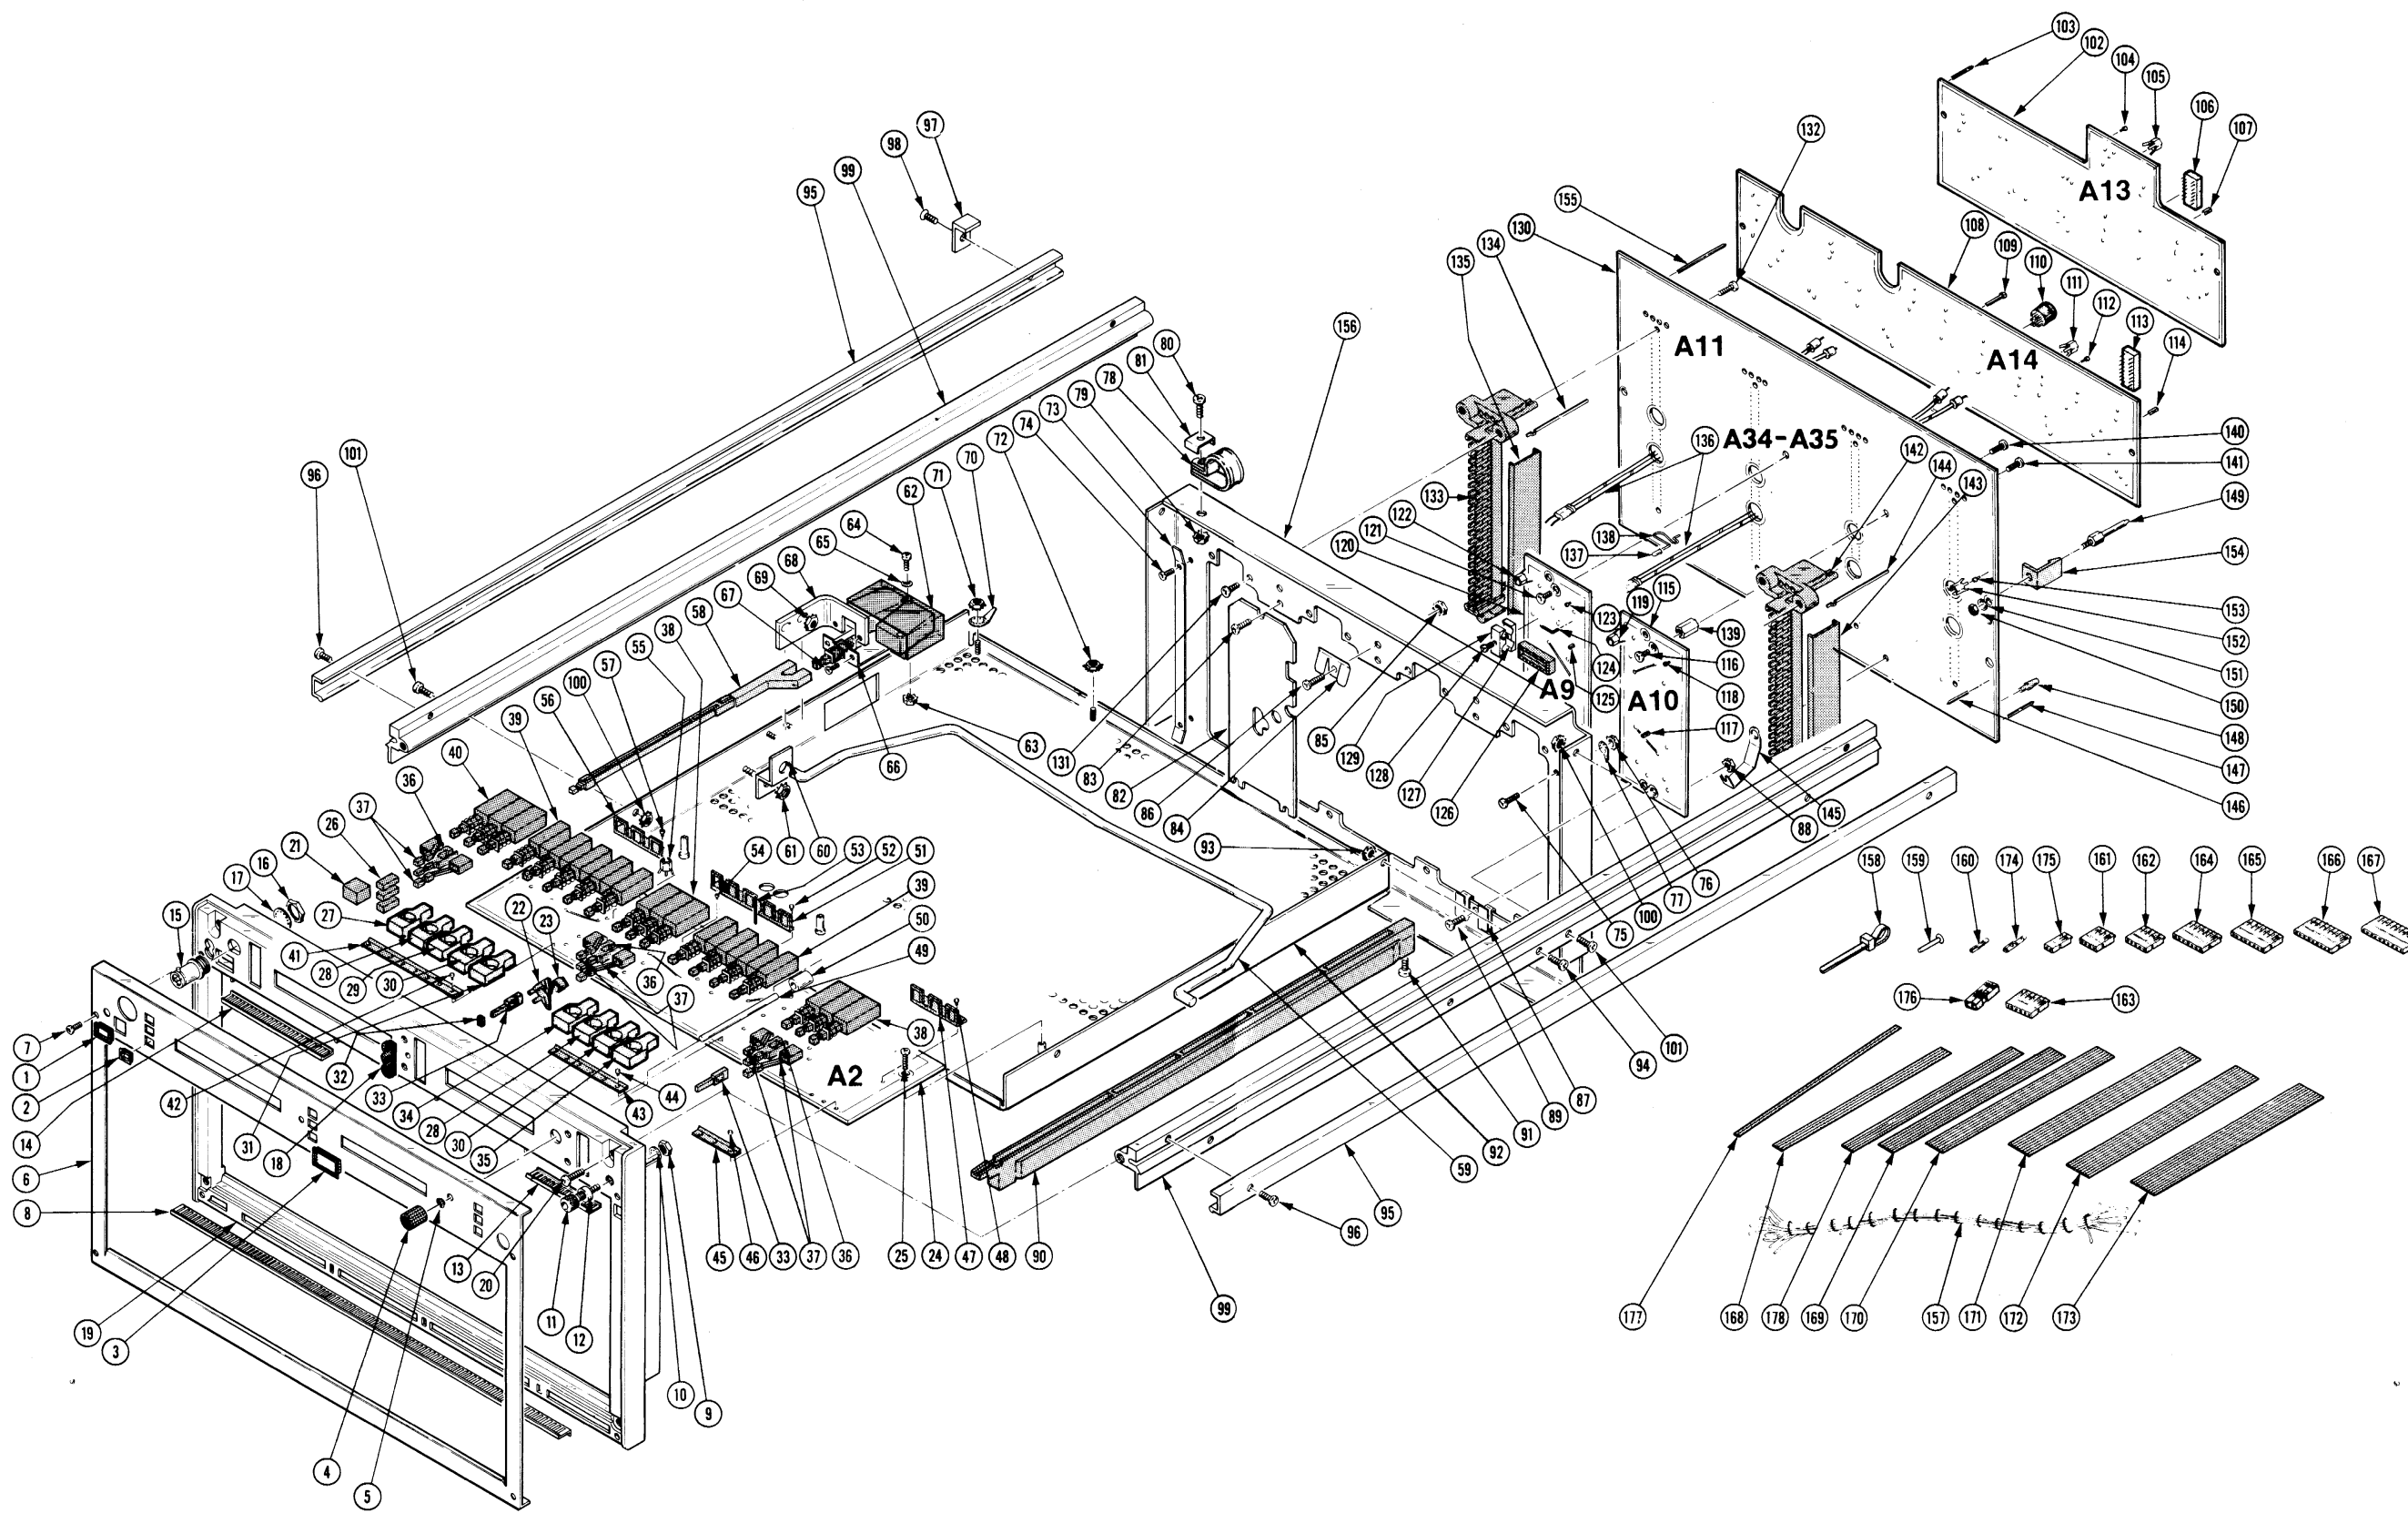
LOWER UNIT & PLUG-IN HOUSING
